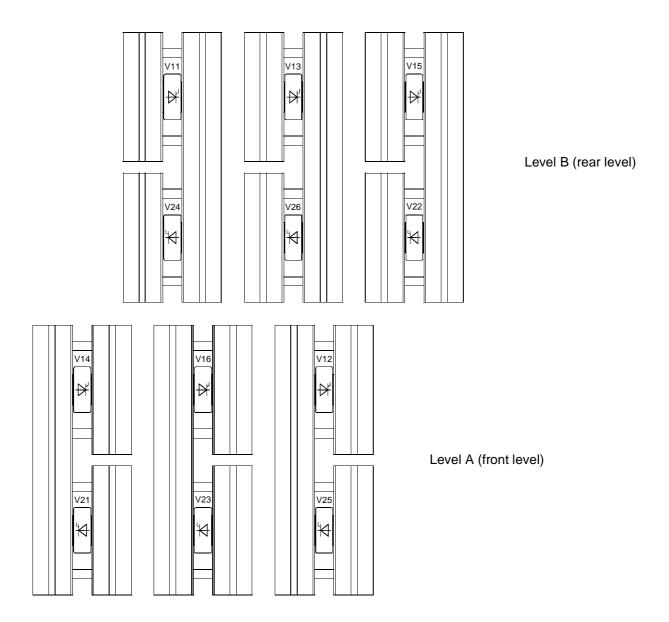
Arrangement of the thyristor blocks, Size H (see dimension drawing in Section 2.4)
